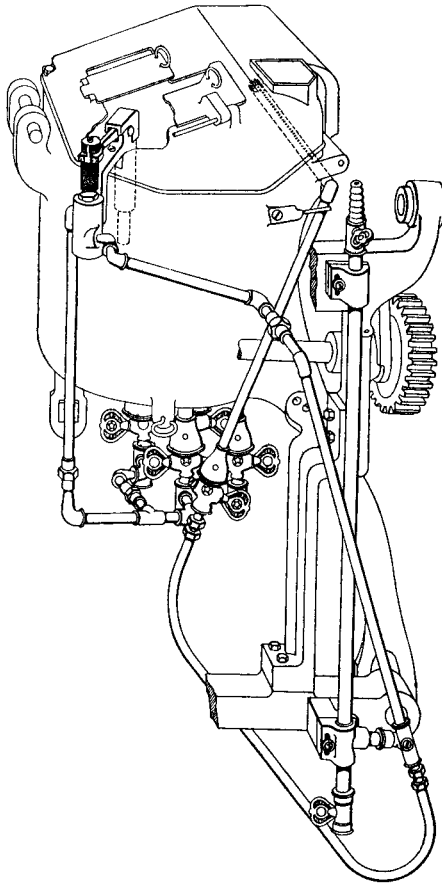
Assembled view of gas pot, burners and connections for 42-em Linotype equipped with former gas thermostat.
